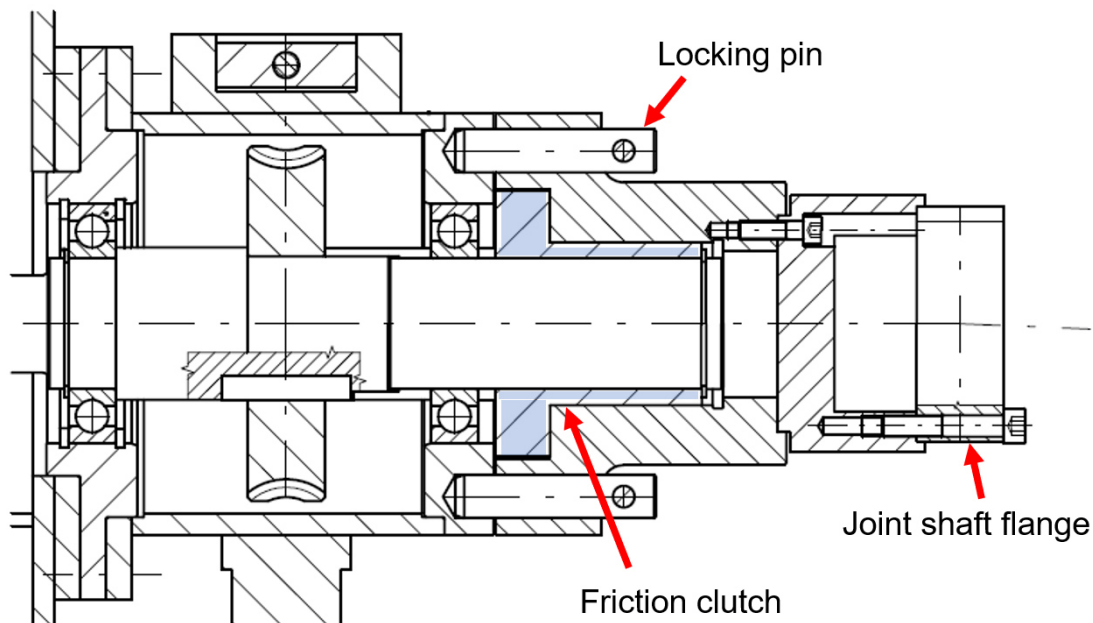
Cross section of the pretensioning mechanism for one load-level tests (friction clutch)
